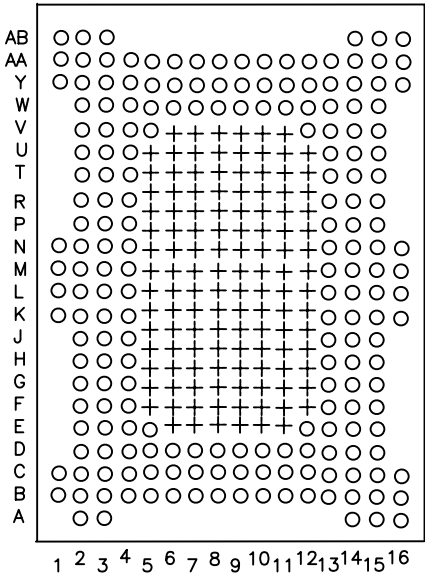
SOLDER BALL PATTERNS (BOTTOM VIEWS)
